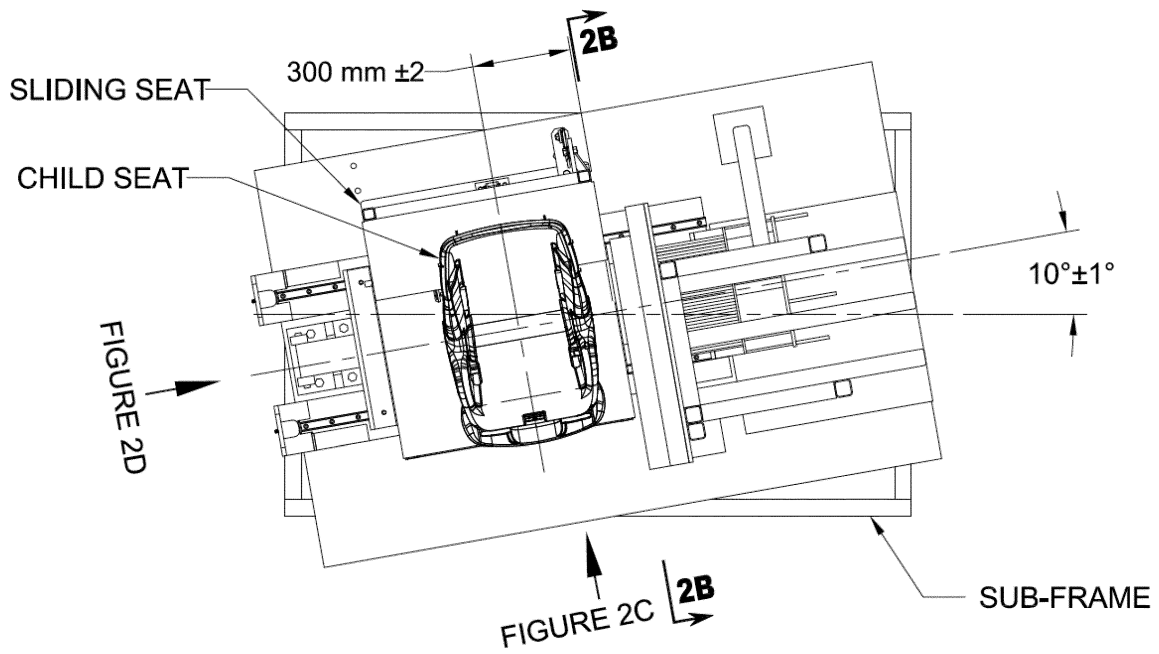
B to § 571.213a. Side Impact Seat Assembly Door Panel View
